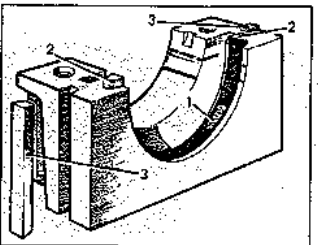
Early type rear main bearing cap and oil seal carrier (Sec 39)
